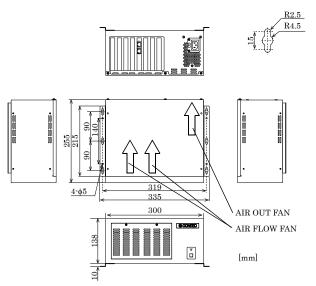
Outside Dimensions < ECH(PCI)SF-H7A, Horizontally placed >
